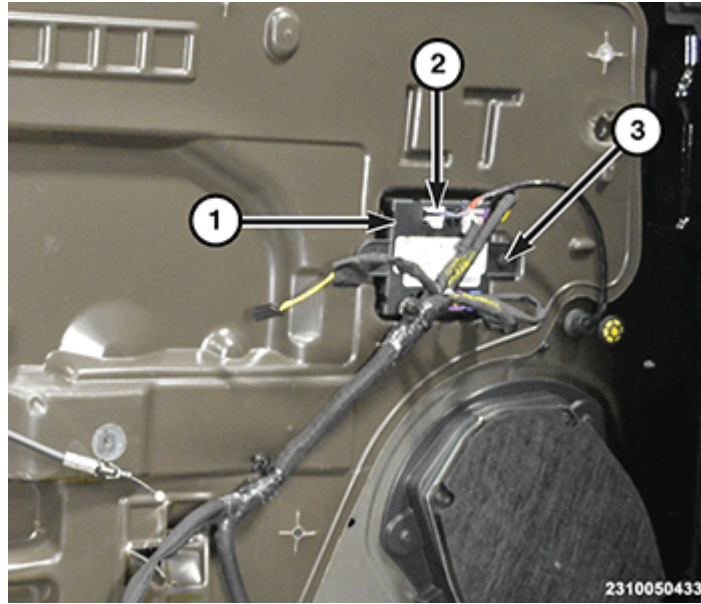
Door Control Module, Wire Harness Connectors & Screw
